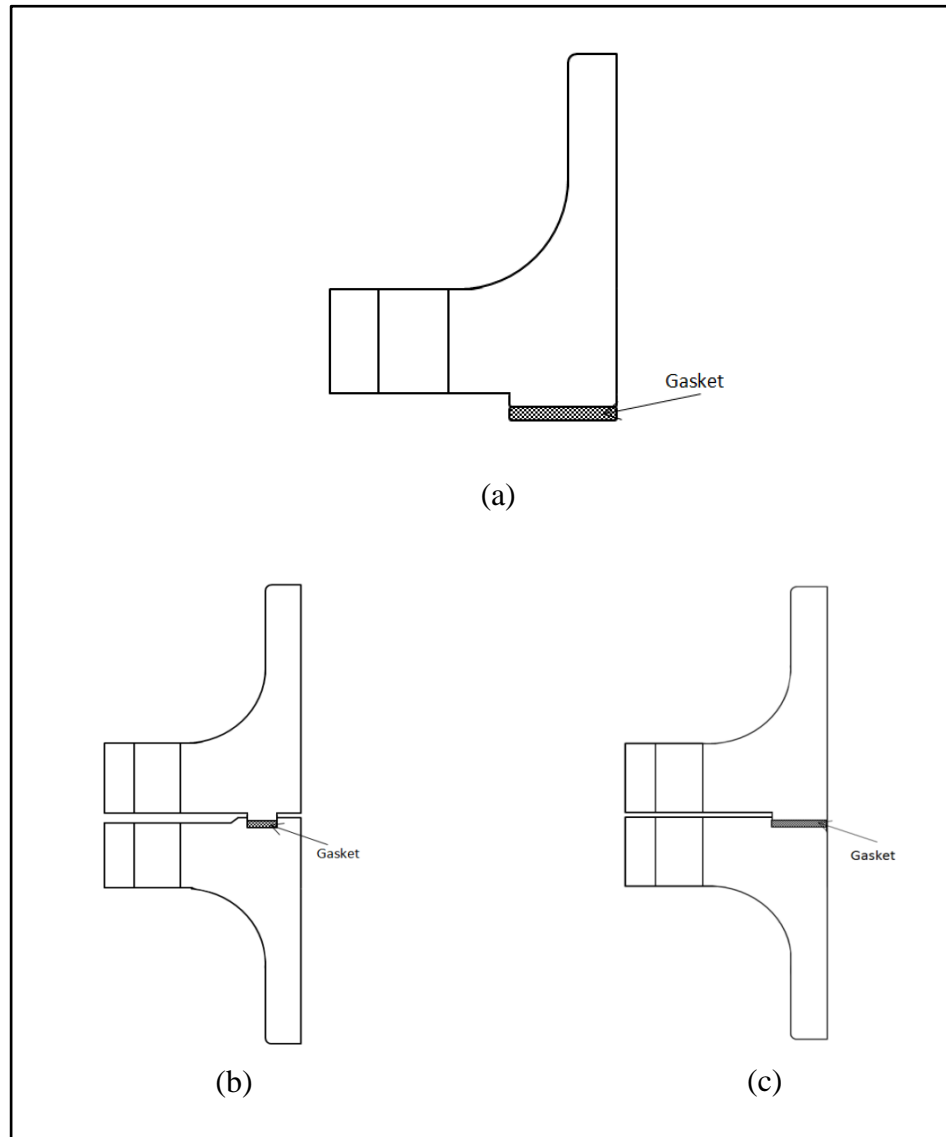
Metallic flange (a) Raised face flange (b) Tongue and groove flange
